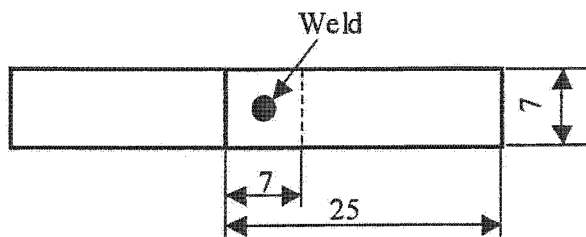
Schematic illustration of resistance spot welding set-up. (unit: mm)
